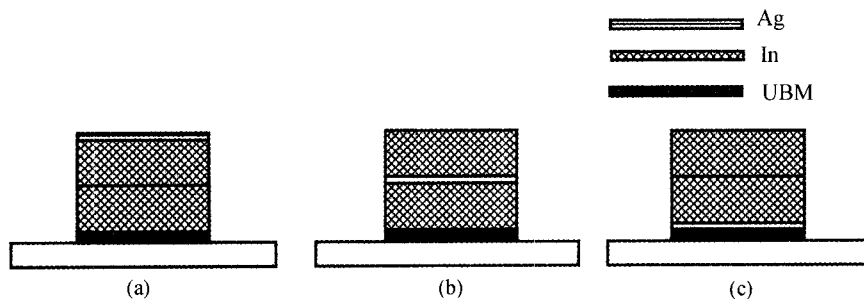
Schematic diagrams of solder bumps formed with different sequenc of solder layer deposition. (a) Ag/In, (b) In/Ag/In, and (c) In/Ag solder bumps.
